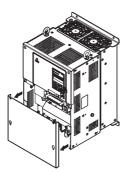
Removing the Terminal Cover on an IP00 Enclosure Drive
